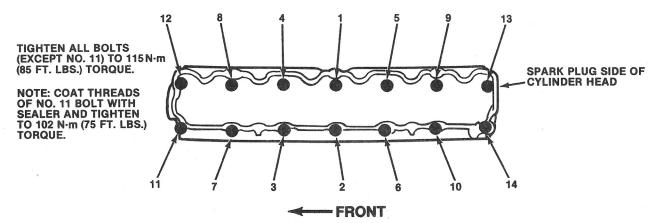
Bolt Tightening Sequence and Torque Specifications
